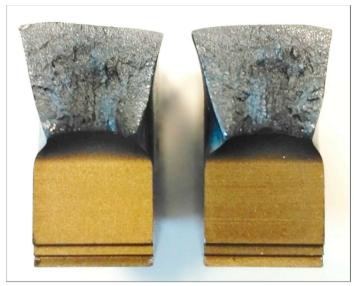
Fracture surface for specimen D26 showing extensive plastic deformation at the free surface but no visible ductile tearing preceding cleavage fracture.
